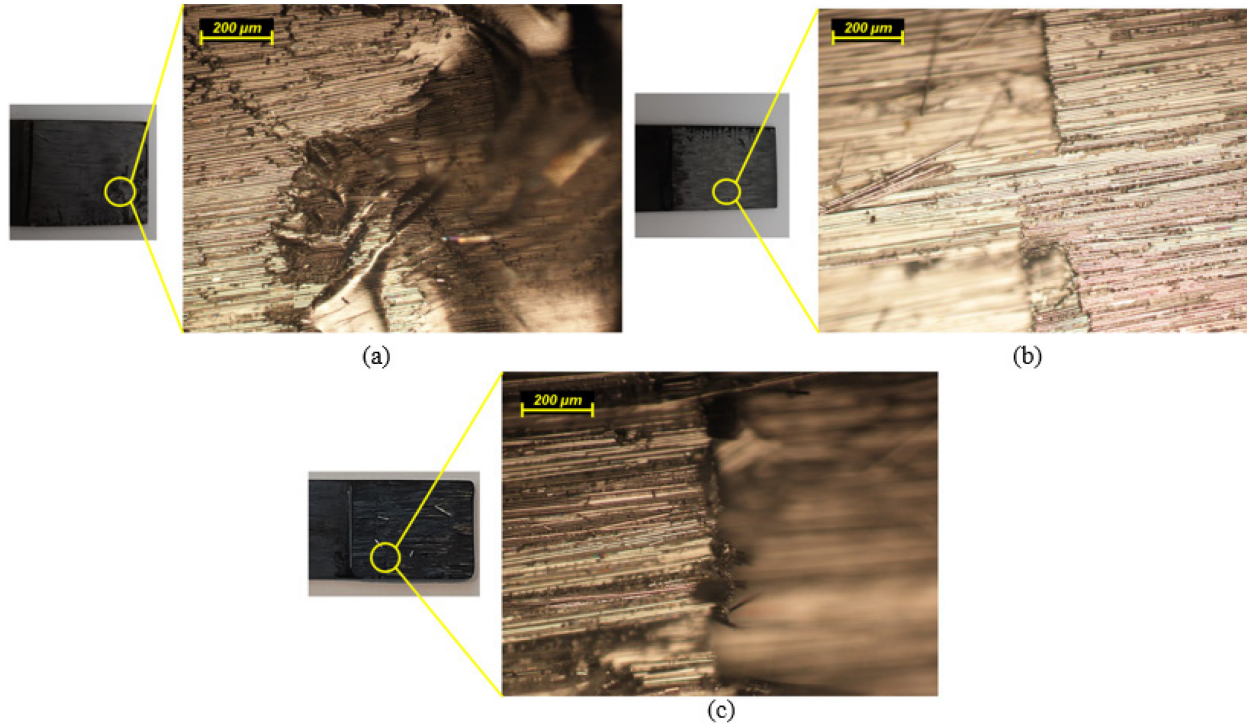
Images taken from the fractured bonding area of a few selected coupons: CFRP bonded with epoxy adhesive (Test 4) (a), CFRP bonded with reinforced epoxy adhesive (Test 1) (b), and ZT-CFRP bonded with reinforced epoxy adhesive (Test 4) (c).
